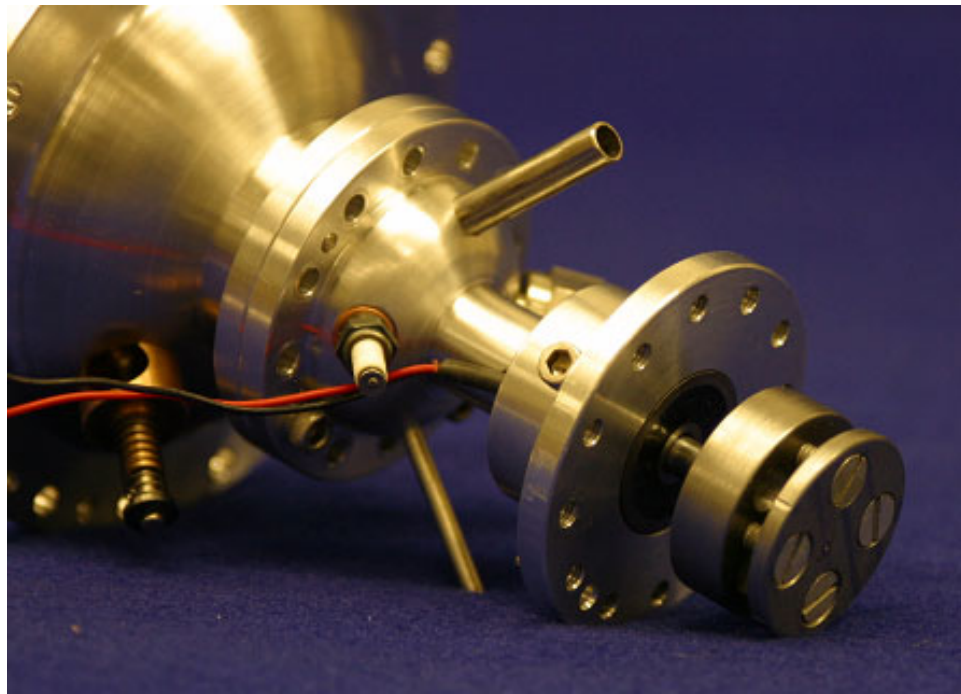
Implemented Combustion Valve Keeper. Note the Press-fit Electromagnet
